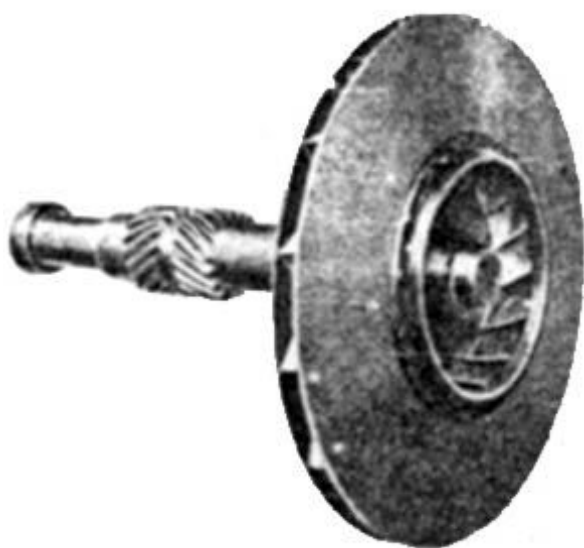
Impeller with pinion shaft for FIG.2.30
